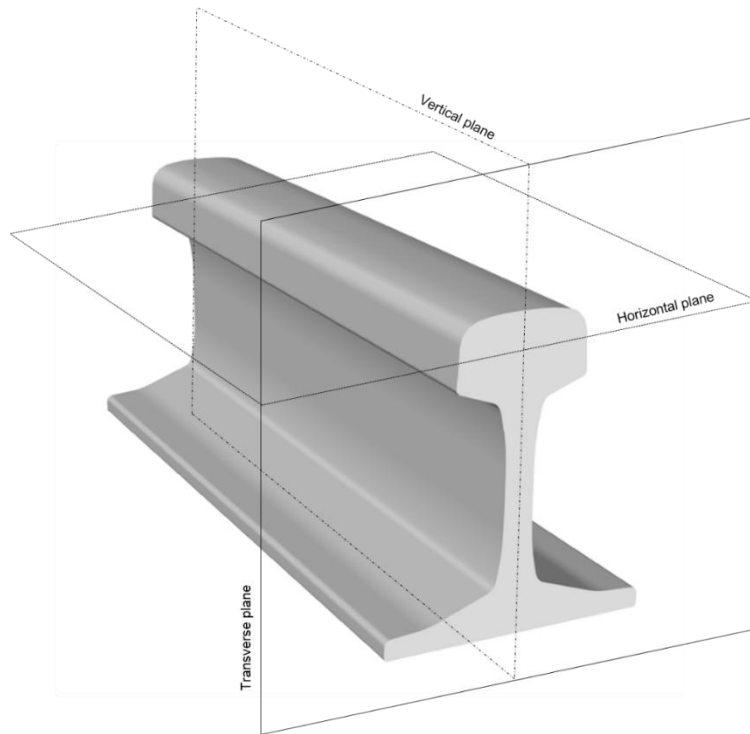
Rail cross section indicating the vertical, horizontal and transverse planes
